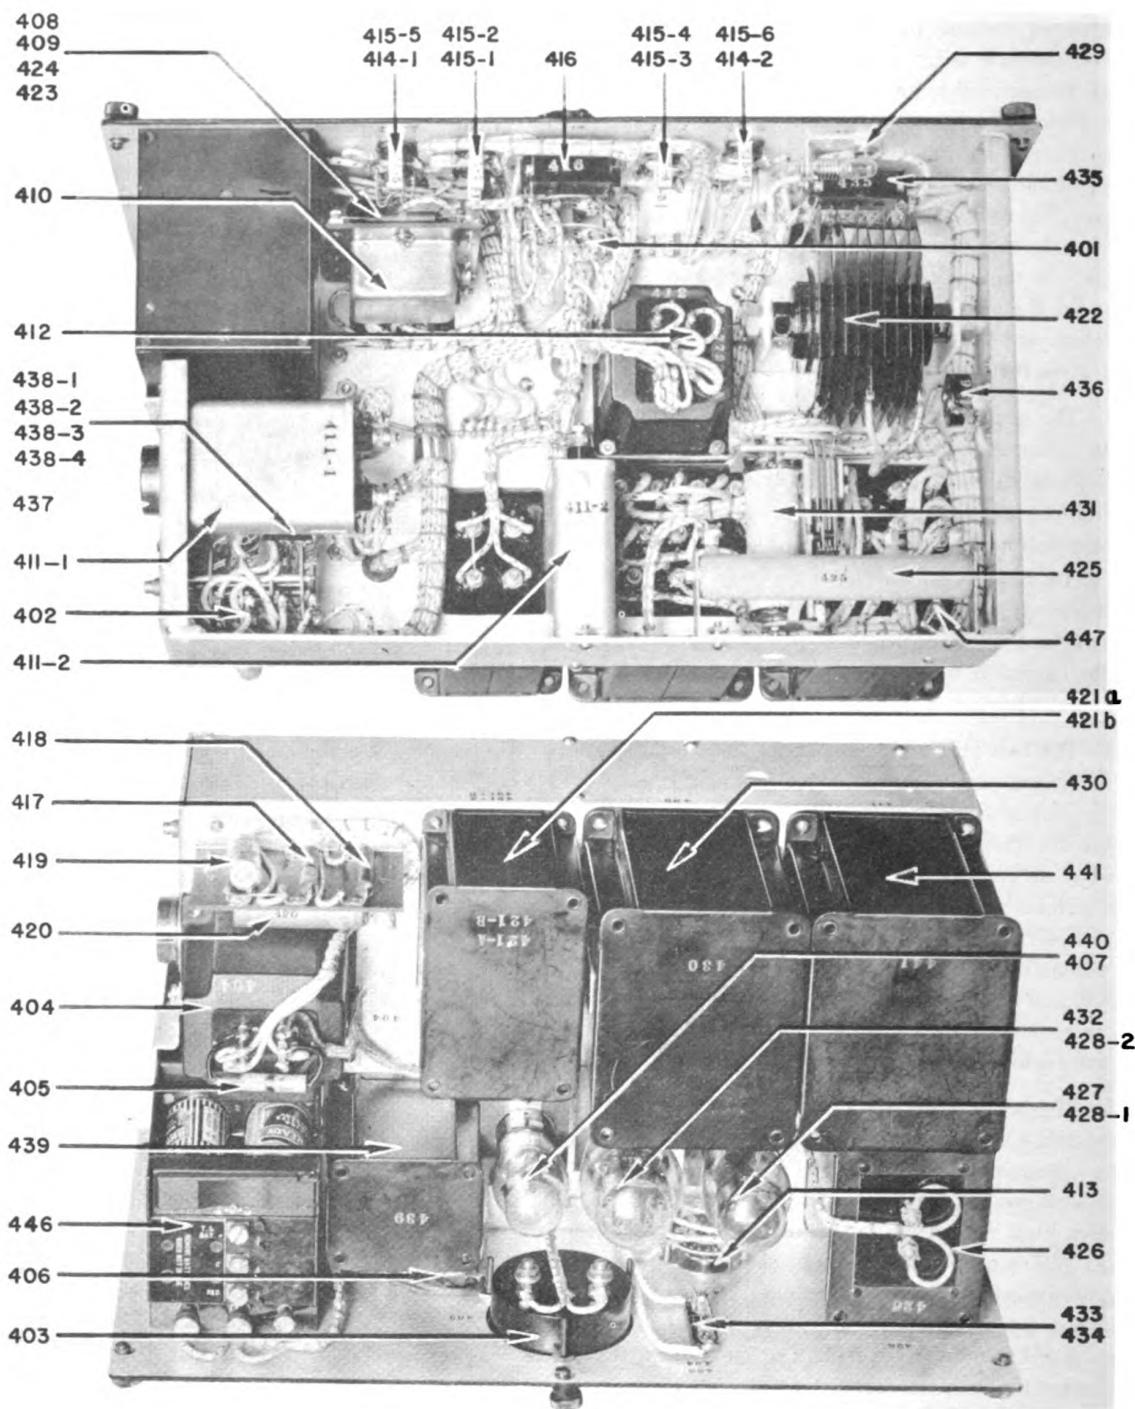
CONTROL UNIT RM-7-B, VIEWS OF CHASSIS REMOVED FROM CABINET
